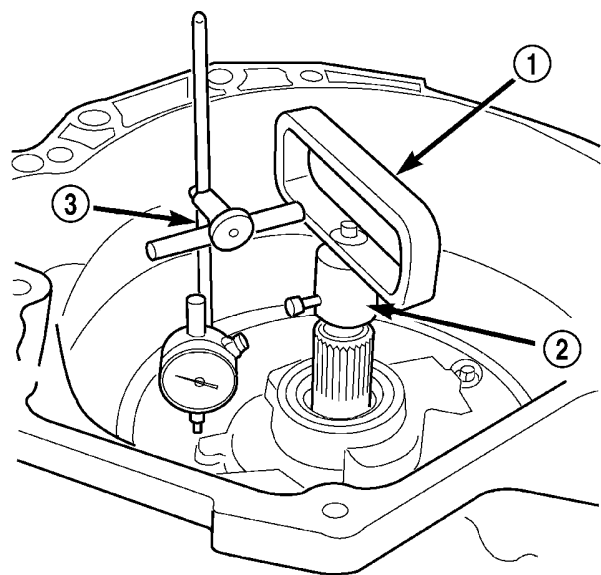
Measure Input Shaft End Play using End Play Set 8266
